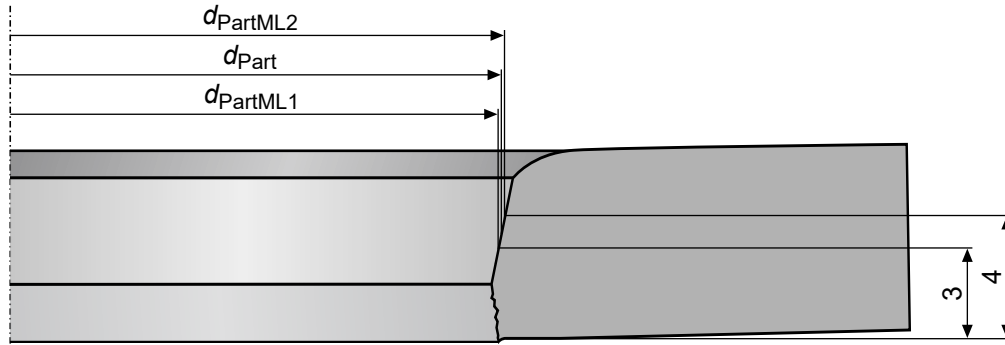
Schematic illustration of the size measurement of a specimen with a fracture zone and significant bending.
